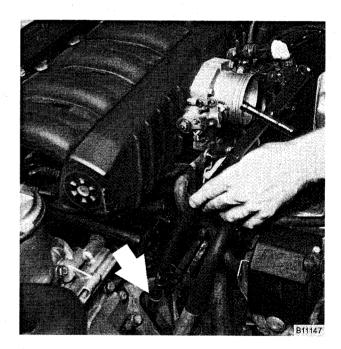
Oil dipstick guide tube being removed. Use a new O-ring (arrow) during installation.
